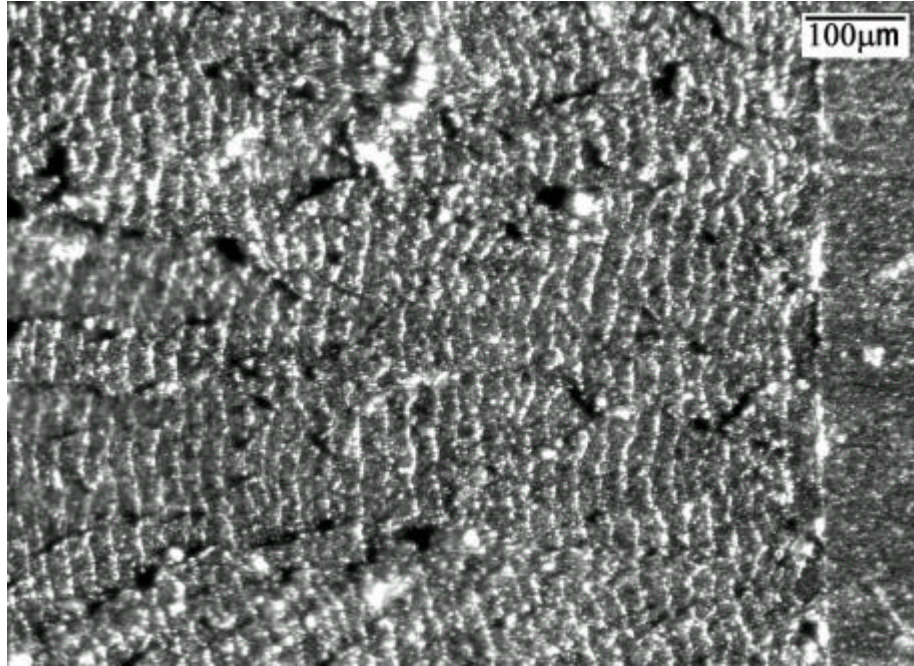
Typical striation pattern on the fractured surface of Zr-2.5Nb tube after DHC testing
